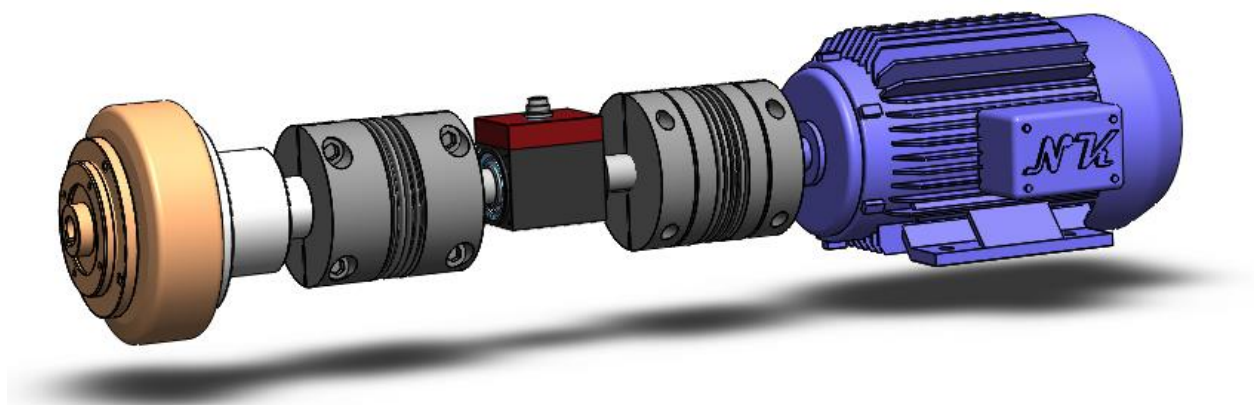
The 3D Assembly of a Test Bench Components (without the Test Bed)[15]–[18]
